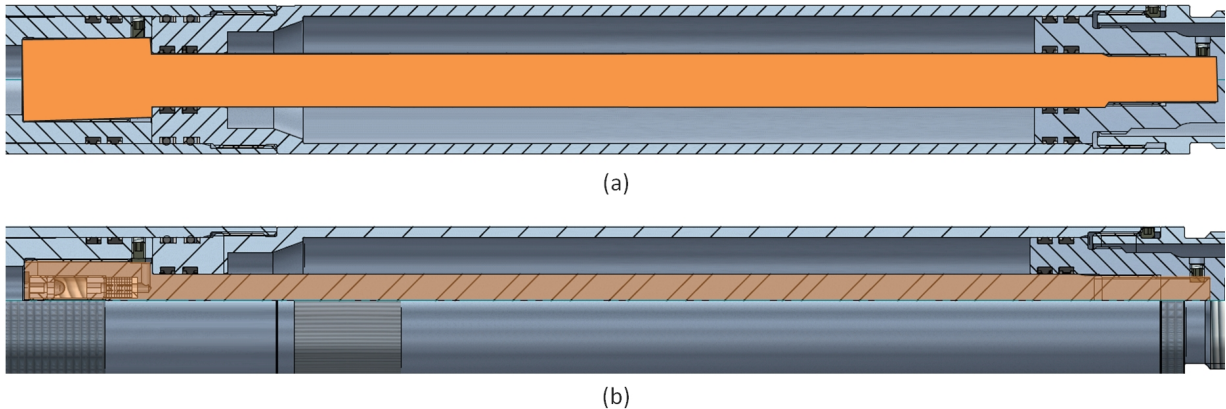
Setting Chamber Mandrel in 2.70" HSU 10" Stroke (a) shape of Setting Chamber Mandrel (b) quarter cut view
